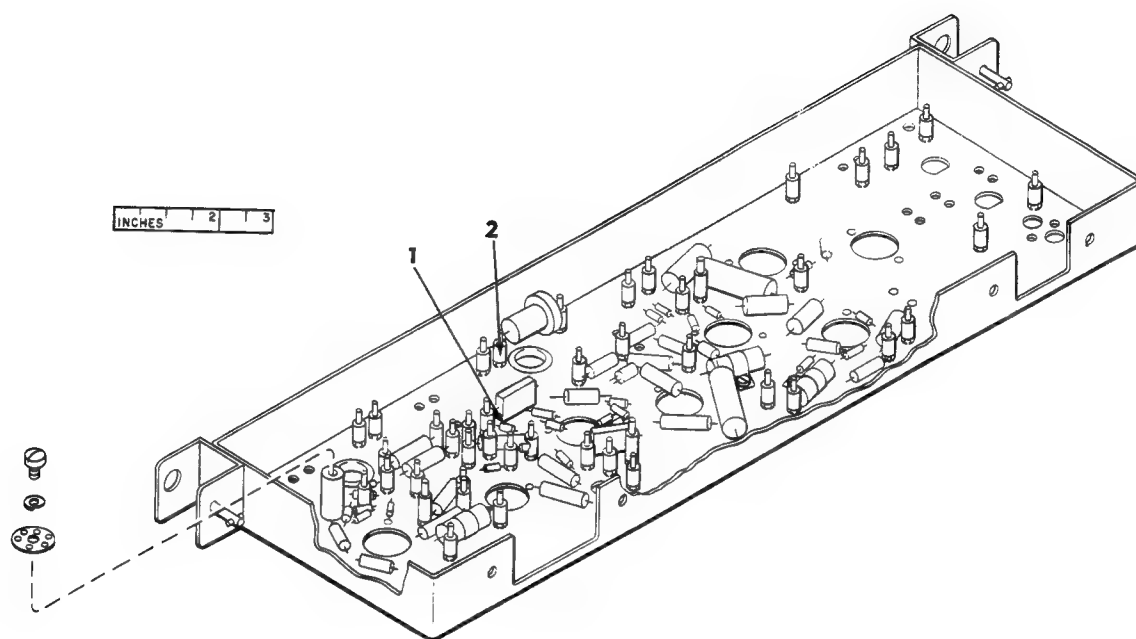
Generator, pulse sweep (9139349)—partial exploded view
